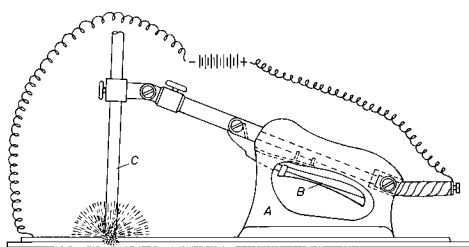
Apparatus for applying a fused metallic coating for ornamental or other purposes in the British welding patent 12,984 issued to N. de Benardos and S. Olszewski on October 28, 1885. Layers of metal are formed by holding an insulated stick of metal in the electric arc. See text for description.
